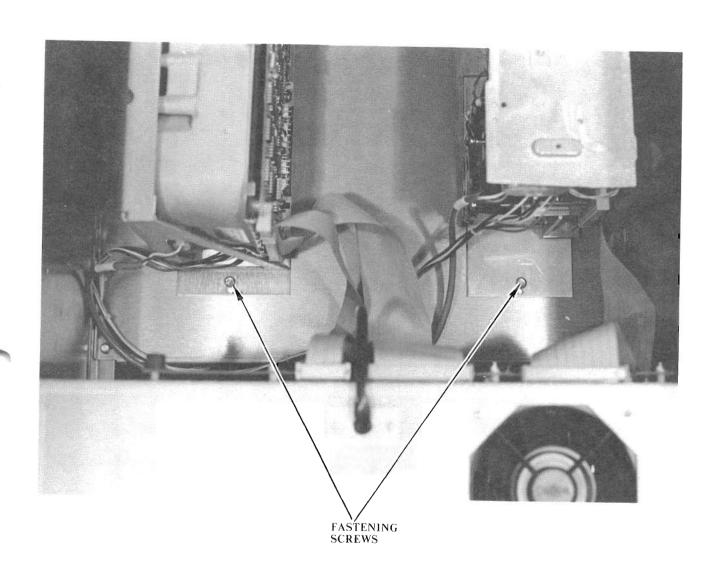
DISK DRIVE FASTENING SCREWS
